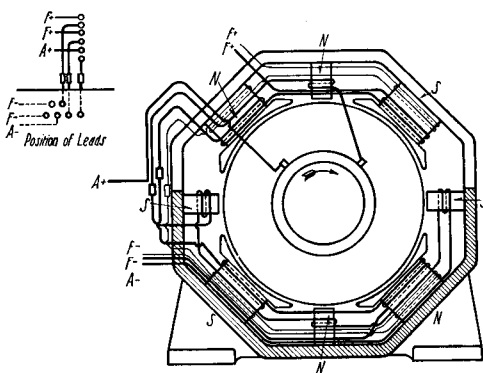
Type MCO Motor Frames 60 to 80 Inclusive
